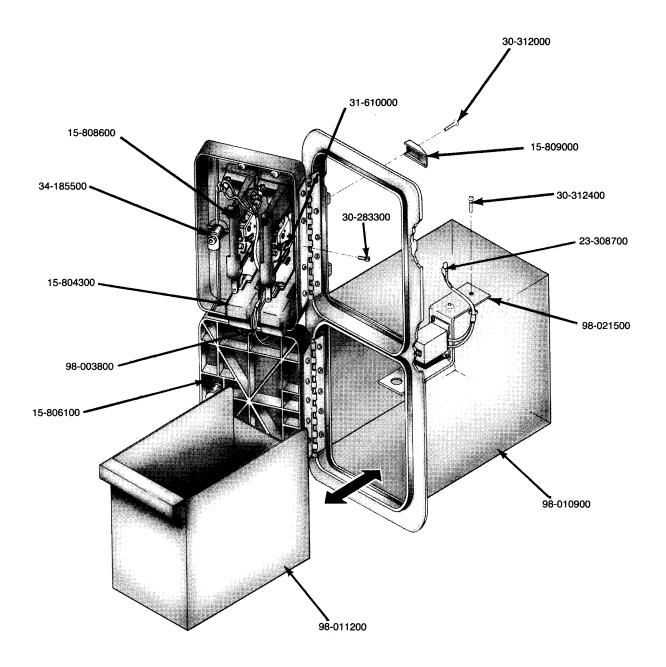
Speaker Box Assembly (000-8005-10-0A)
